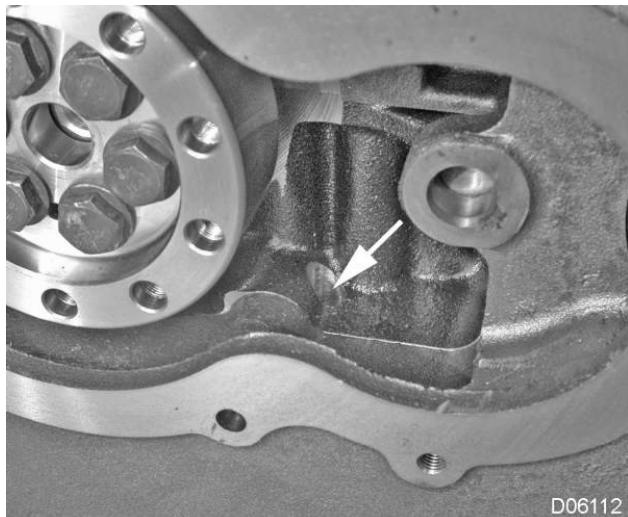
Inspect Oil Drain Hole Under Idler Gear
